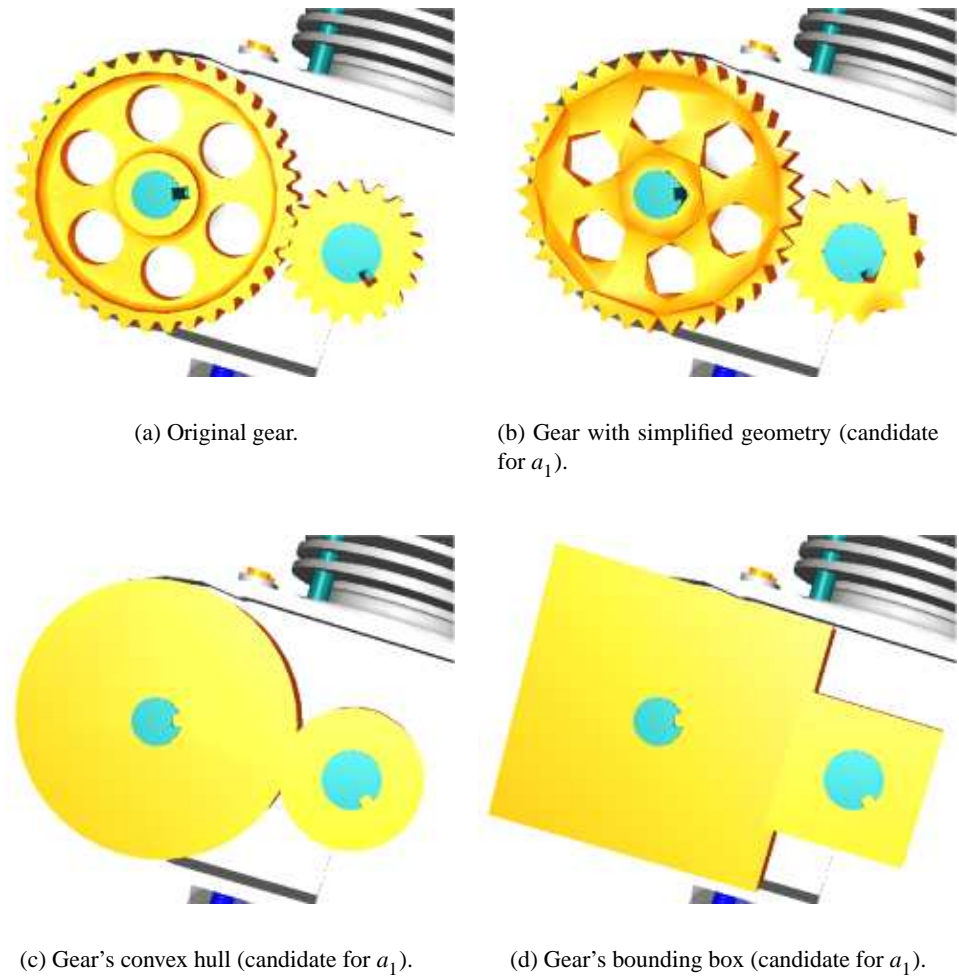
Role-based Viewing Examples of Exterior Gears of Engine Assembly
